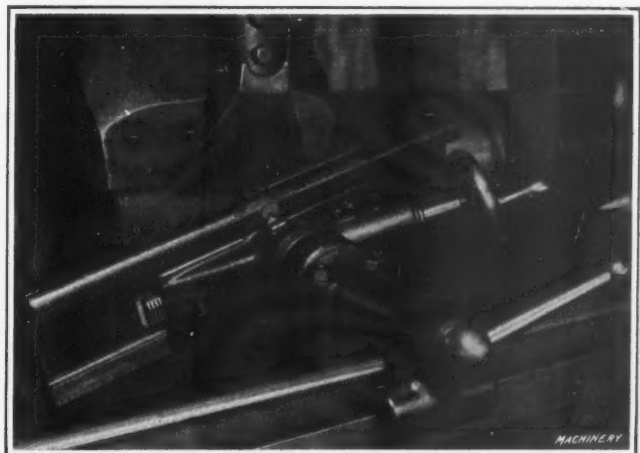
Truing Device for producing Required Concavity in Wheel for grinding a Specified Height of Crown on Pulley
